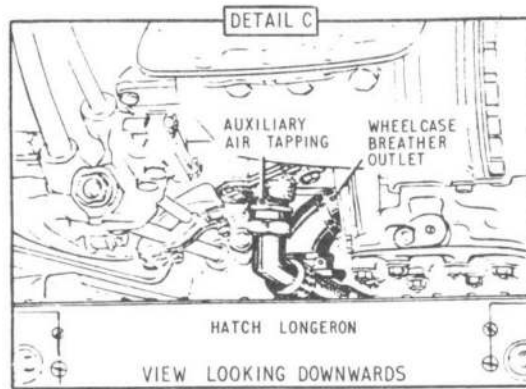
NO.2 E.C.U.- REMOVAL AND ASSEMBLY (2)
